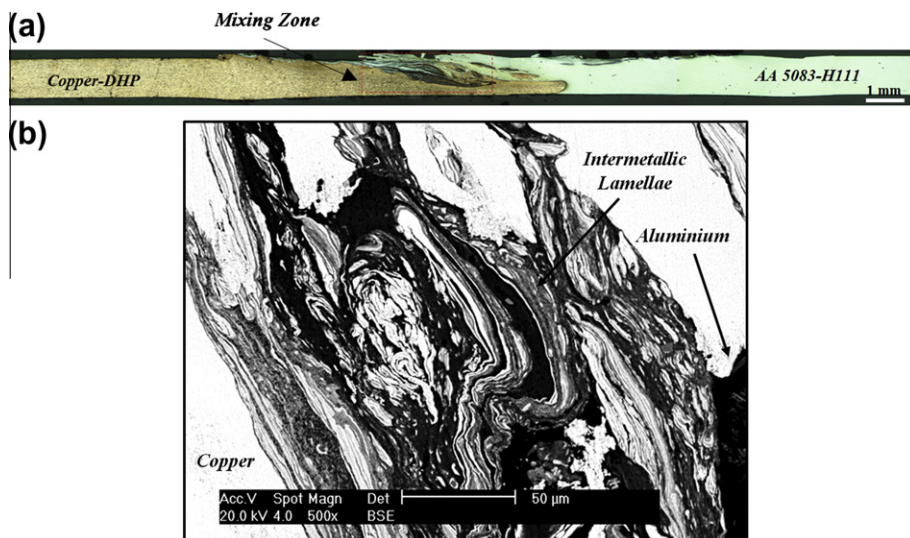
Transverse cross-section (a) and BSE magnification registered in the nugget (b) of a dissimilar weld produced with copper-DHP at the advancing side.
